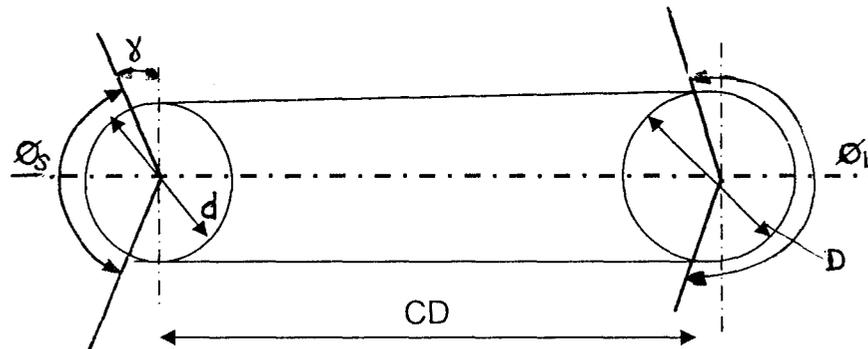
Showing angles of rap for blower and cylinder pulleys.
